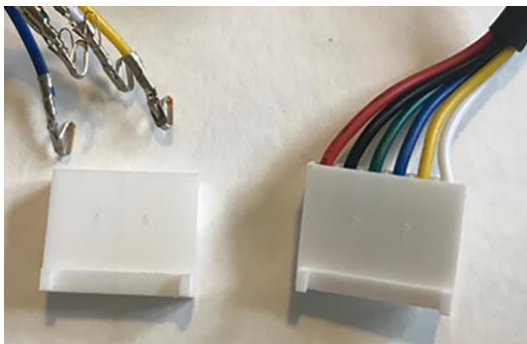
The crimped wires are inserted in the motor connectors in the order shown on the right.
